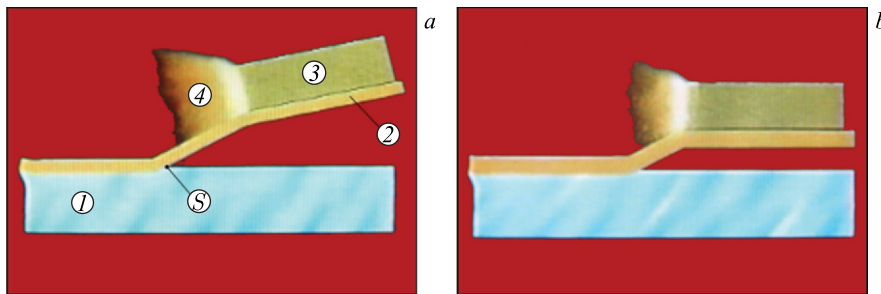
Principal schemes of explosion welding process: with an angle between metal sheets (a); parallel (b): 1 — base plate; 2 — cladding plate; 3 — explosive; 4 — detonation products; S — point (line) of contact of surfaces during welding
